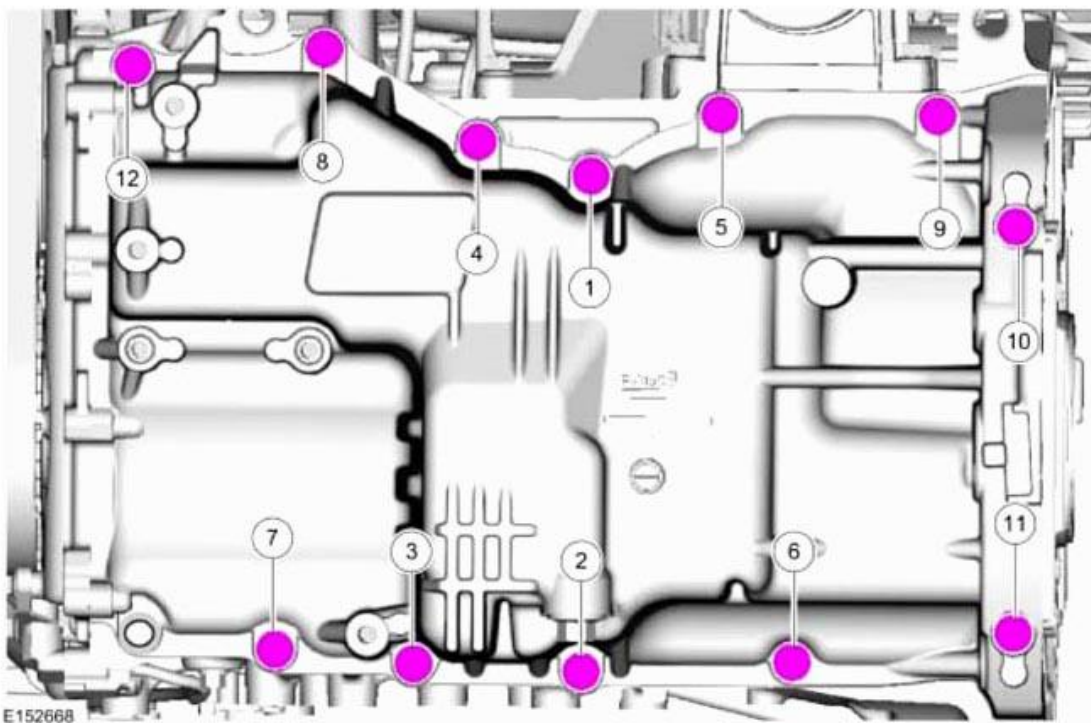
Locating Oil Pan Bolts Tightening Sequence
